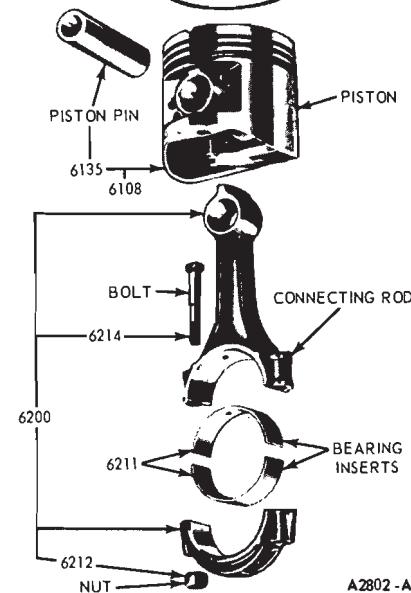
Typical Piston, Connecting Rod and Related Parts
